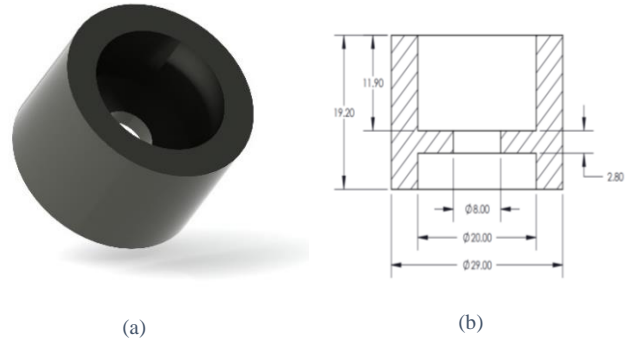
(a) 3D render of flywheel (b) flywheel cross section (dimensions in mm)
